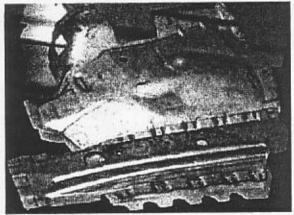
Remote laser welding of car parts(BMW) 23)
